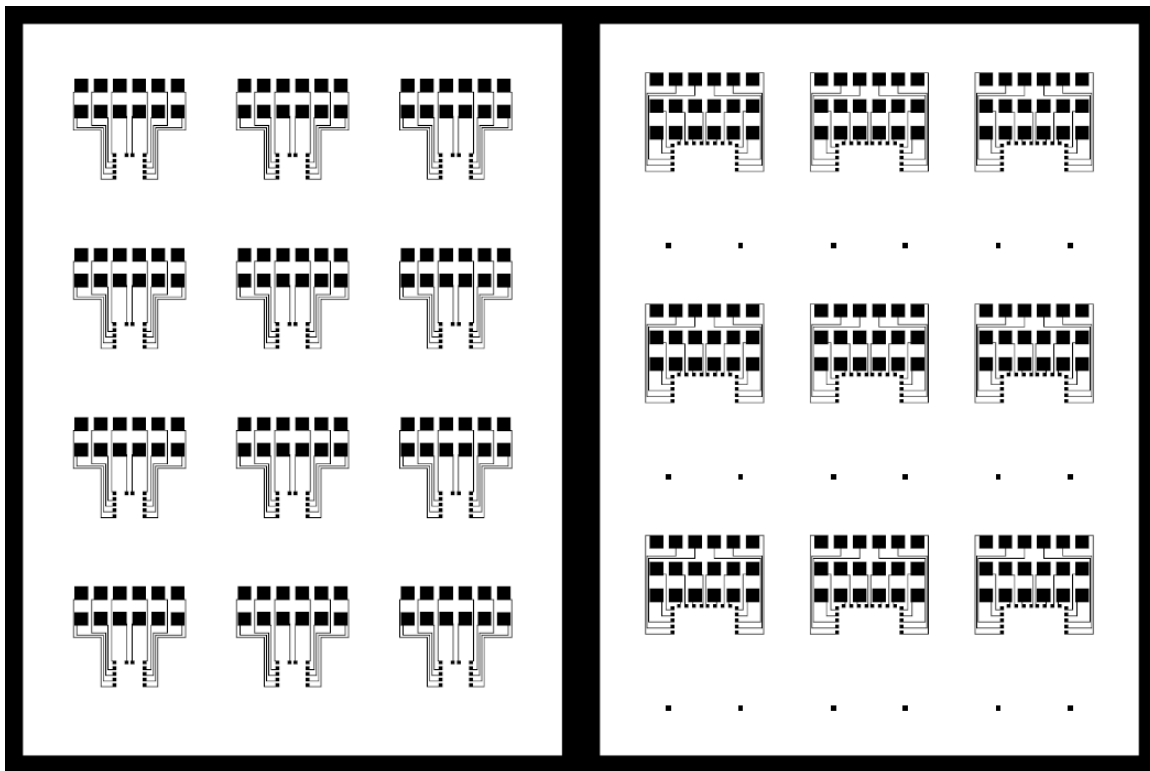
4x6" CAD layout of PCB mask consisting of G1L1 (left) and G1L2 (right) designs
